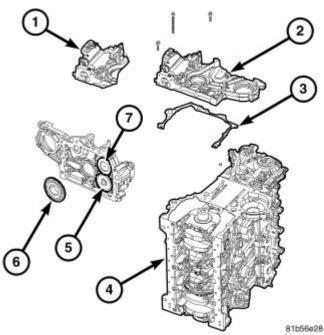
VACUUM PUMP AND OIL PUMP Courtesy of CHRYSLER LLC
